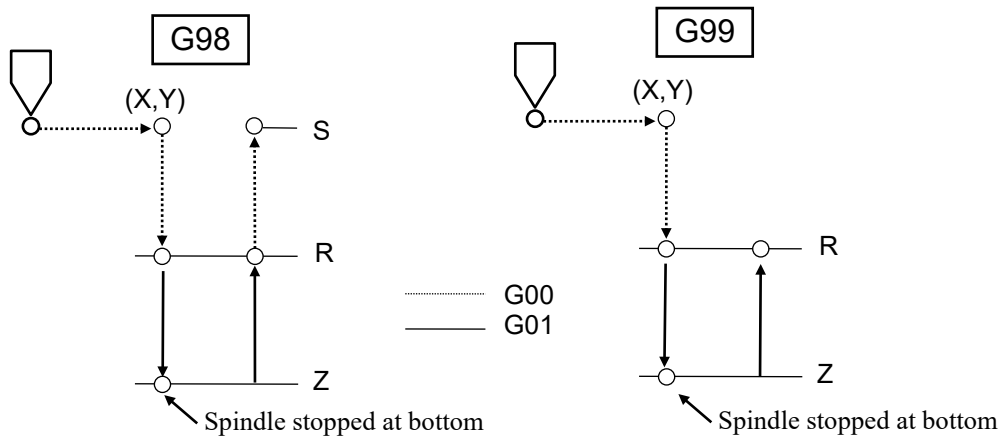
G86 Boring Canned Cycle with Spindle Stopped at Hole Bottom
